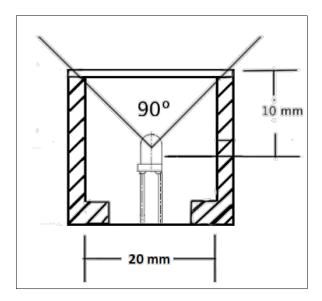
Disposition of the photo transistor inside the PVC cylinder.
